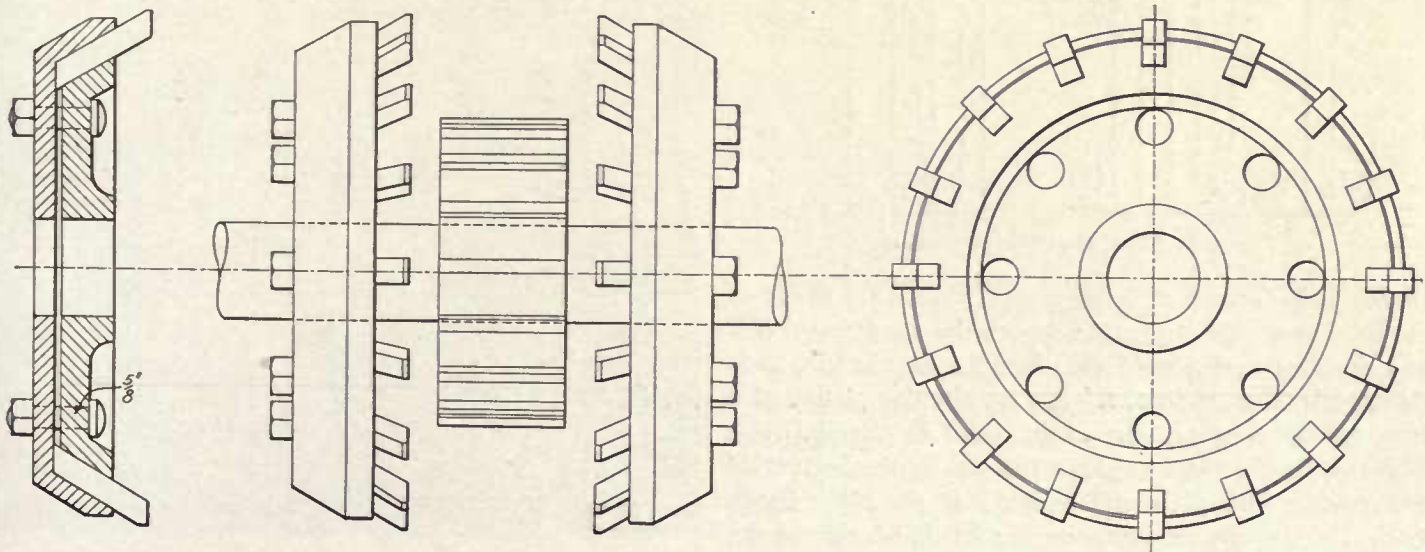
Gang Milling Cutter for Shoes and Wedges and Crosshead Gibs.
